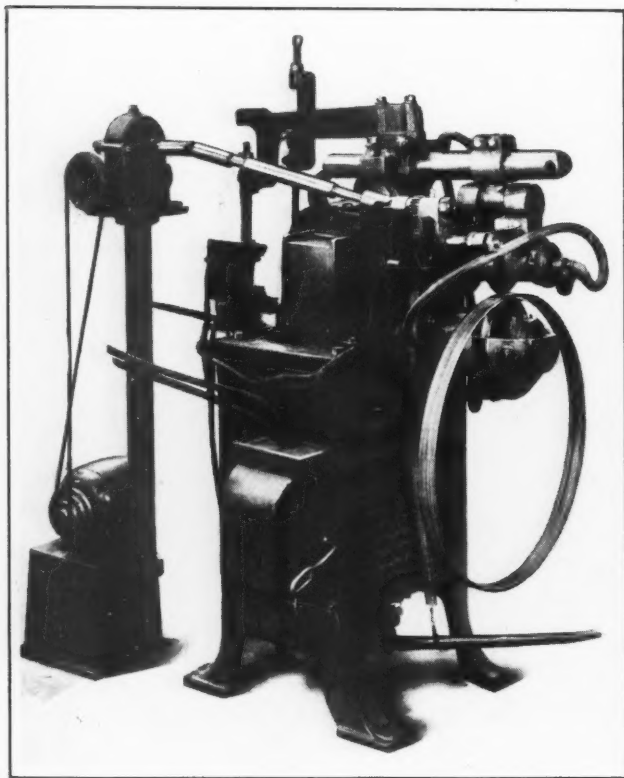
Lewis Seam-welding Head Applied to a Federal Spot-welder
